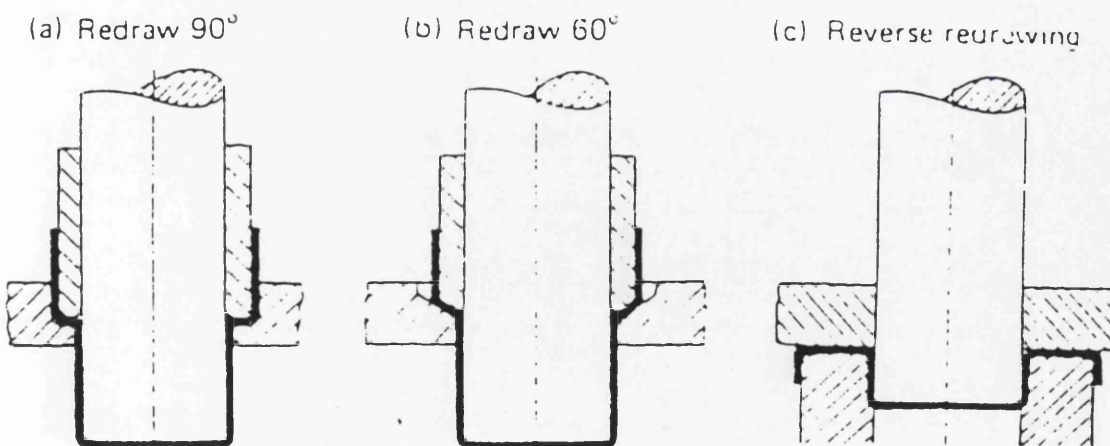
Schematic diagram of redraw tooling used for DRD can manufacture
